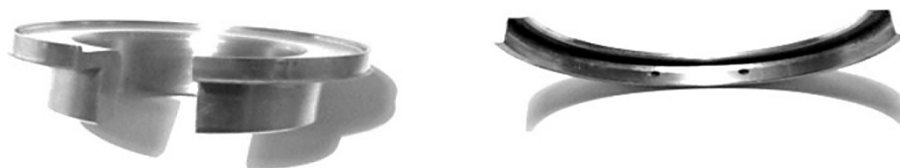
Blanks with an outer and inner edge, obtained by landing with a purposeful displacement of the top of the conical roll.
